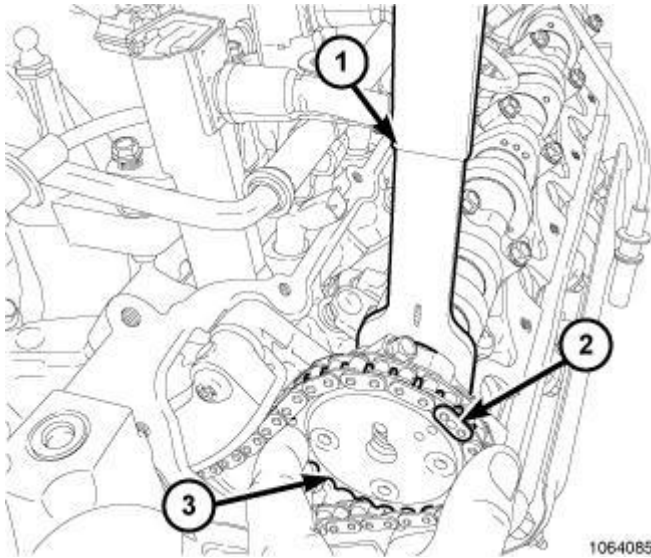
Removing/Installing Camshaft Sprocket Using Camshaft Holder
